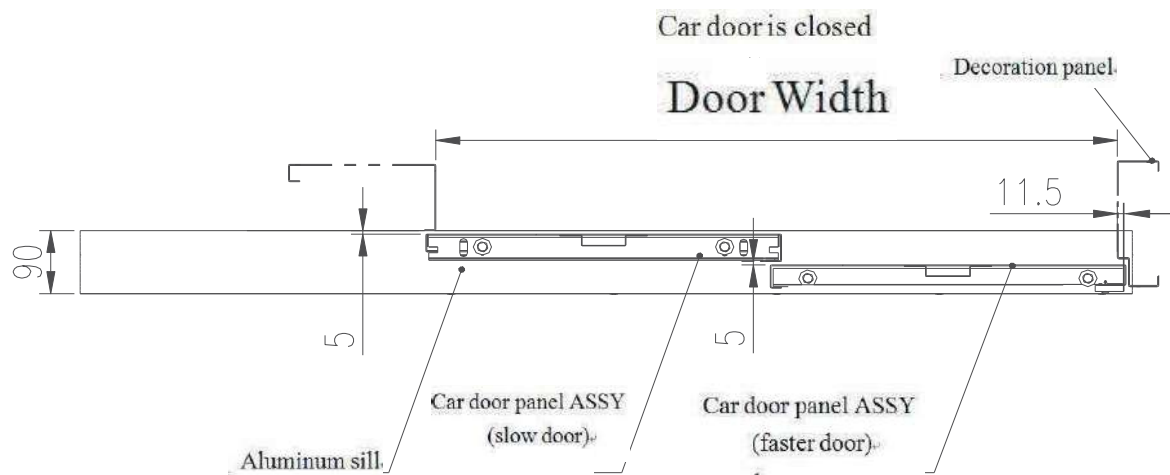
Adjustment requirements of car door and door panels (2 Panels side opening)
